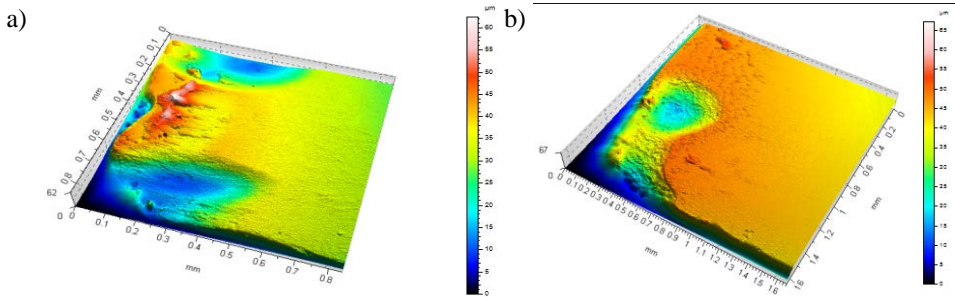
Surface topographies of the turning tool bits made of SW18 steel after: a) dry turning, b) turning with the cutting fluid
